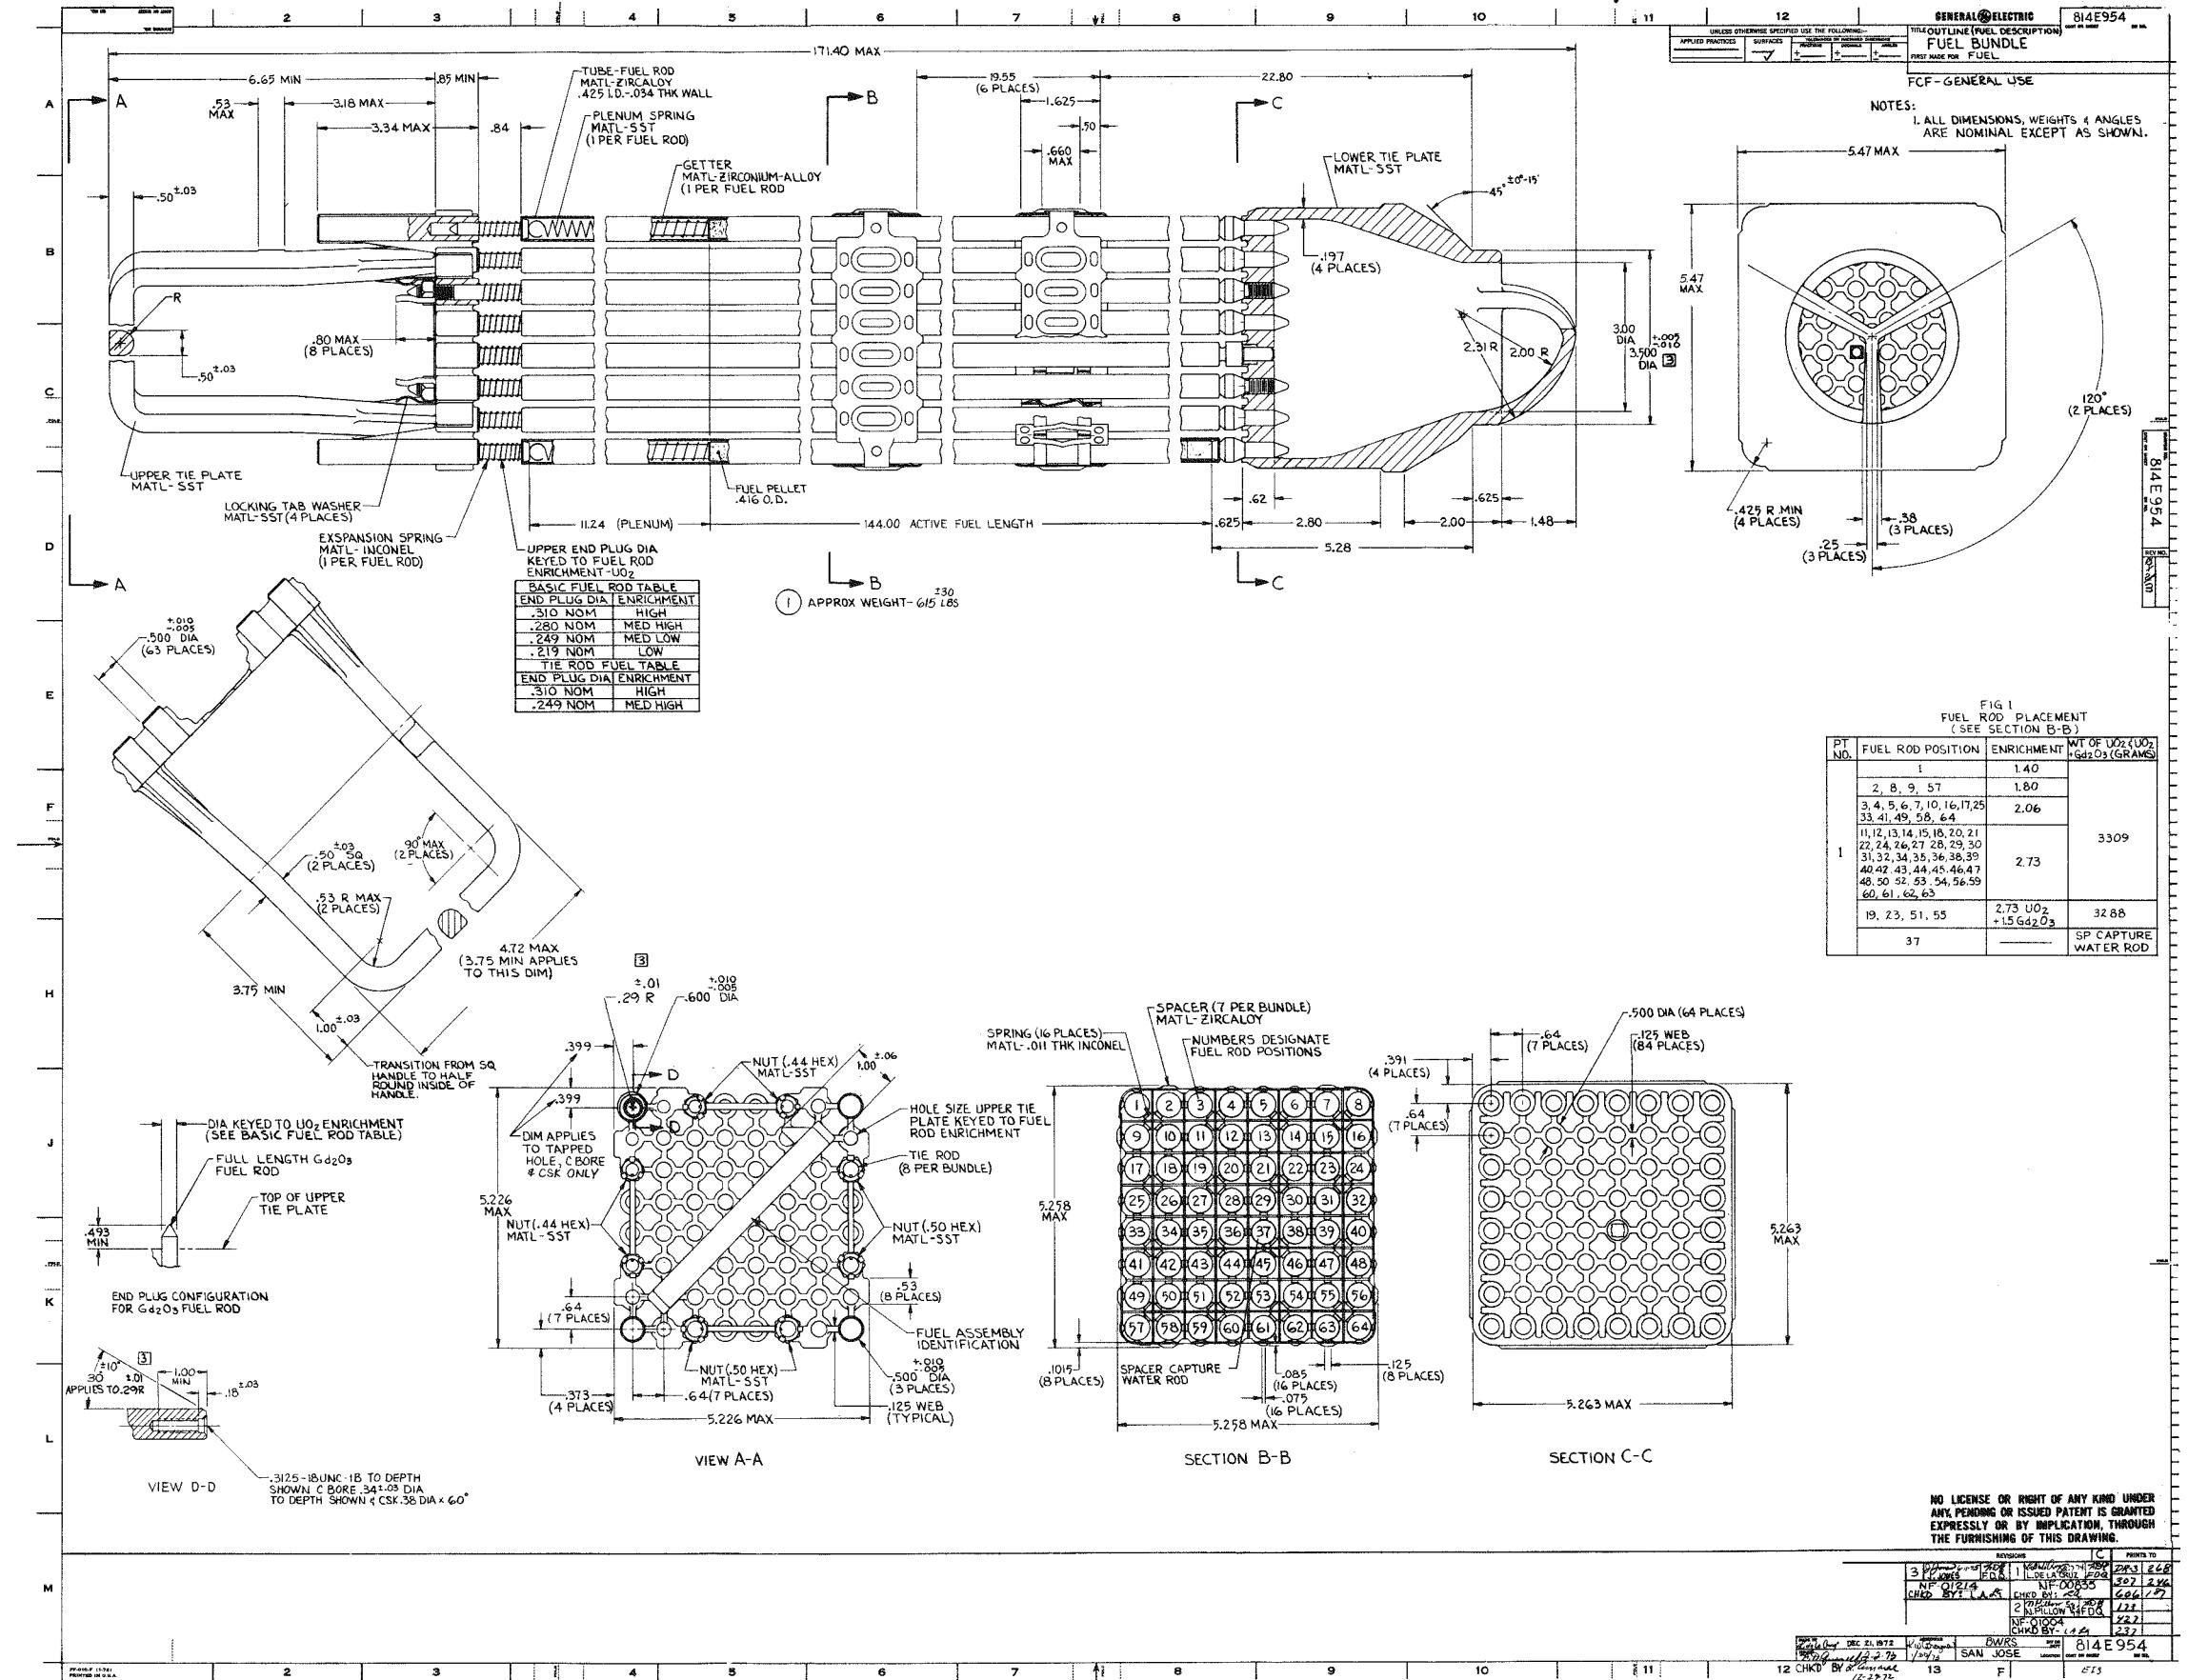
Fuel Assembly Drawing for 8x8 Reload Fuel
